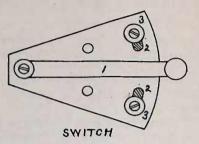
Brass springs Base 2 in. x 4 in., ½ in. thick Binding screws
